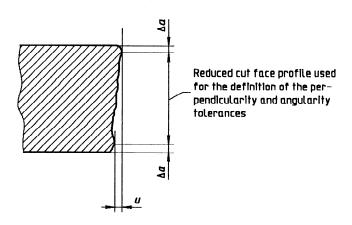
Definition of measuring area for perpendicularity and angularity tolerances
